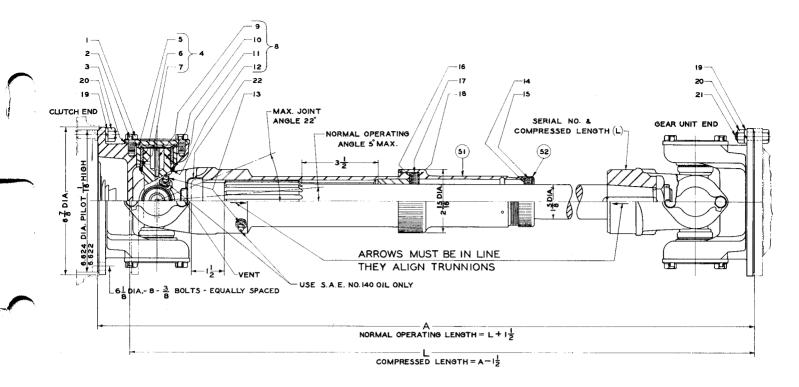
8024-SF PROPELLER SHAFT (Special—Solid Type)
